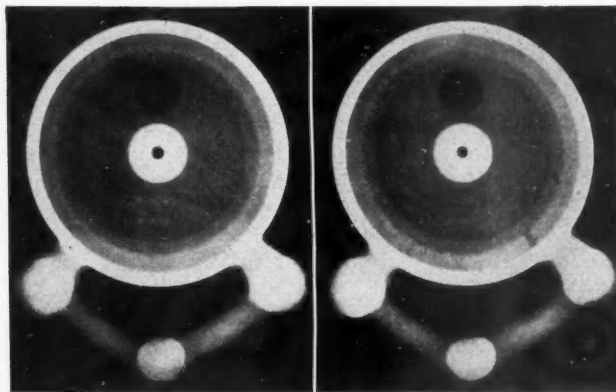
(right)—Casting for outboard engine, poured with the ladle above the mold and Fig. 9b (left) casting poured with the ladle as close to the mold as possible
